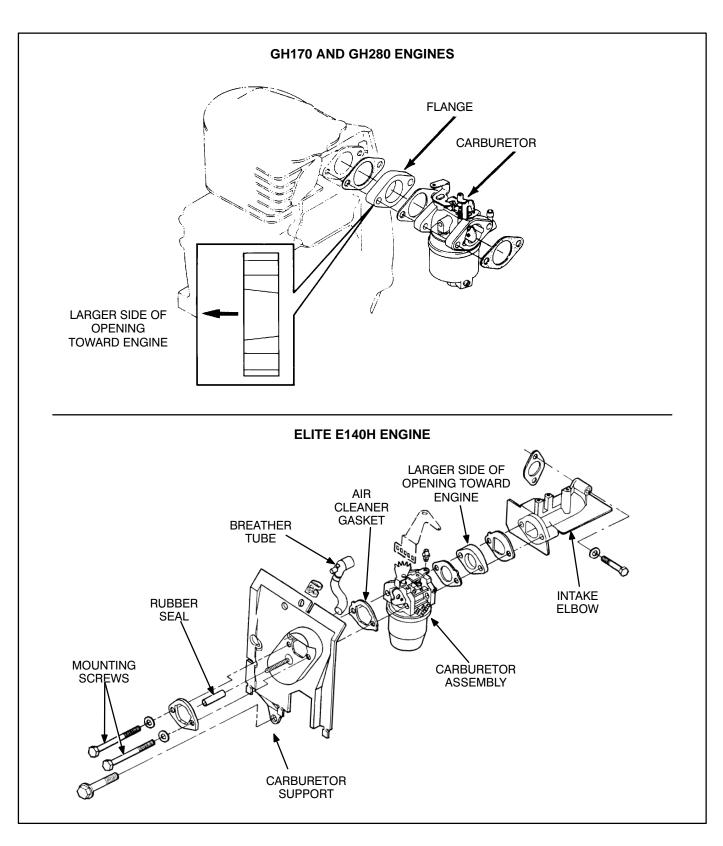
CARBURETOR REMOVAL/REPLACEMENT
